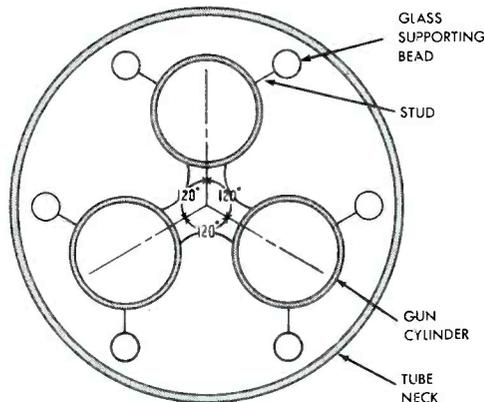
End View of the Gun Assembly in the Color Picture Tube.
